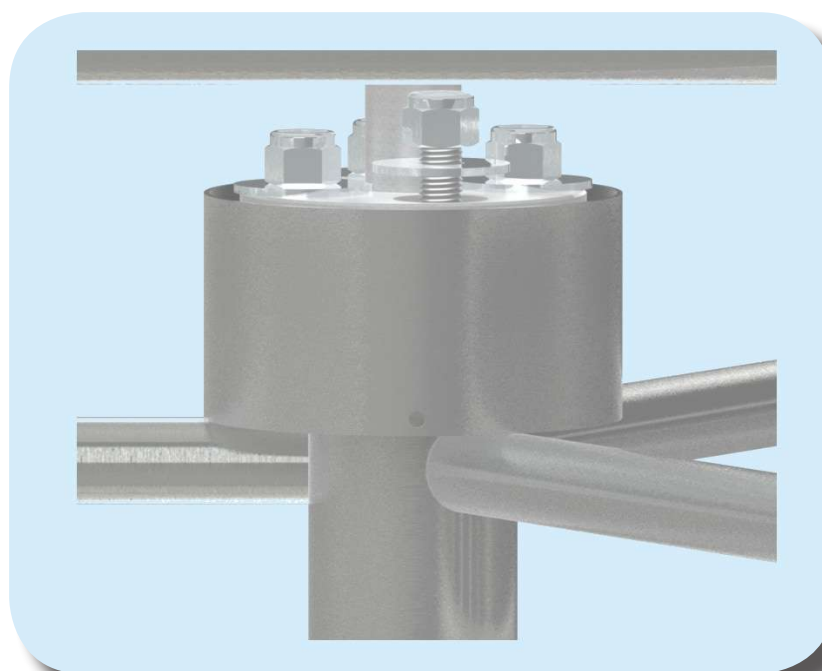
Correct Fitting of Damper Blocks to Head
